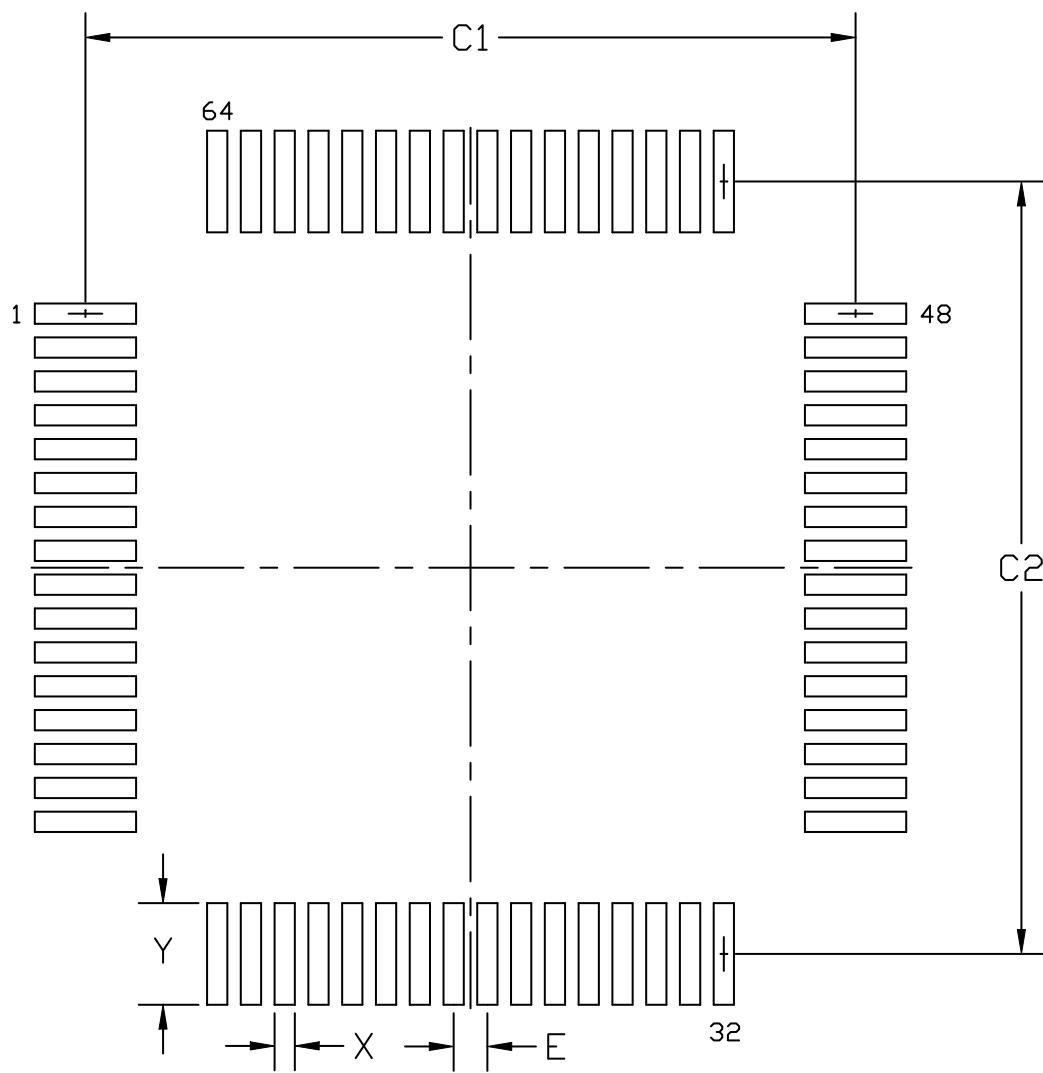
TQFP64 PCB Land Pattern Drawing
